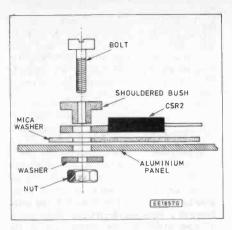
Method of mounting the power triac on the heatsink using a mica insulating kit.
